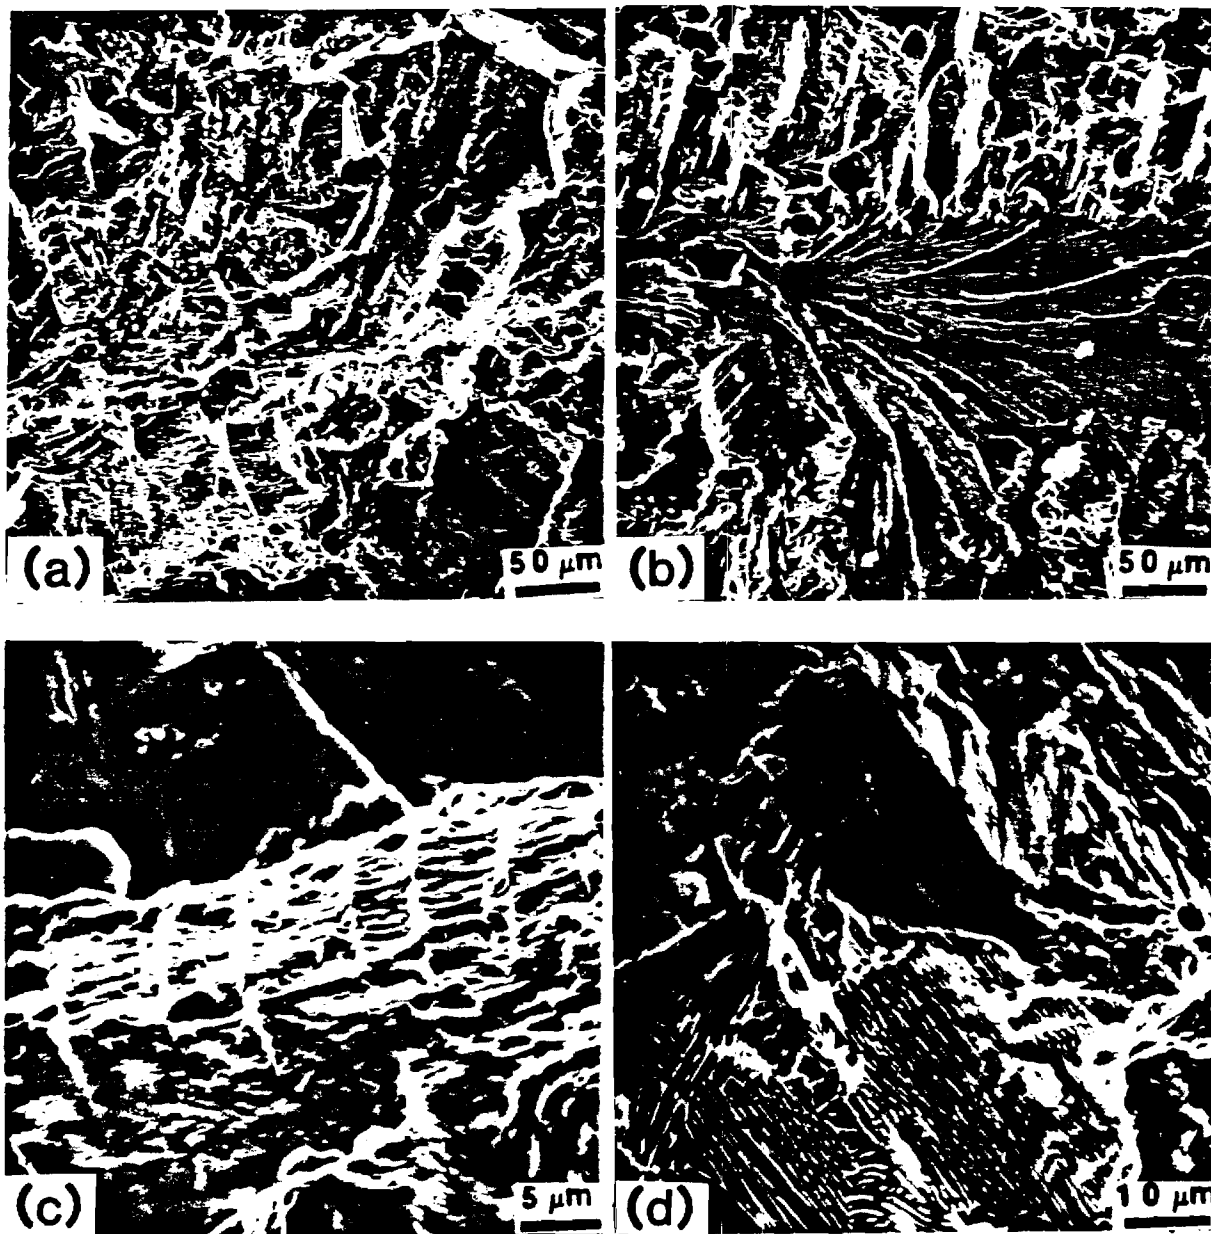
The FCP fractography and fracture mode of the W-1 Ti-6211:
